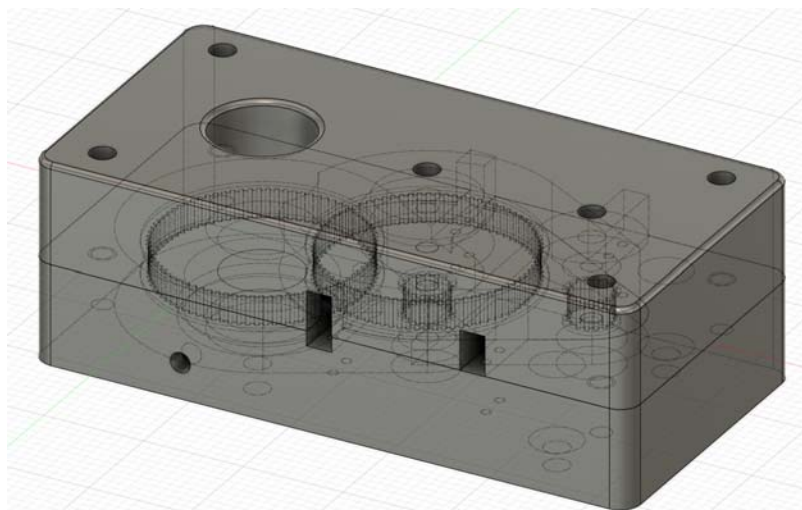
See-thru stack-up of entire elevation assembly less (i) shafts, (ii) tensioners, (iii) bearings, and (iv) pulley belts
